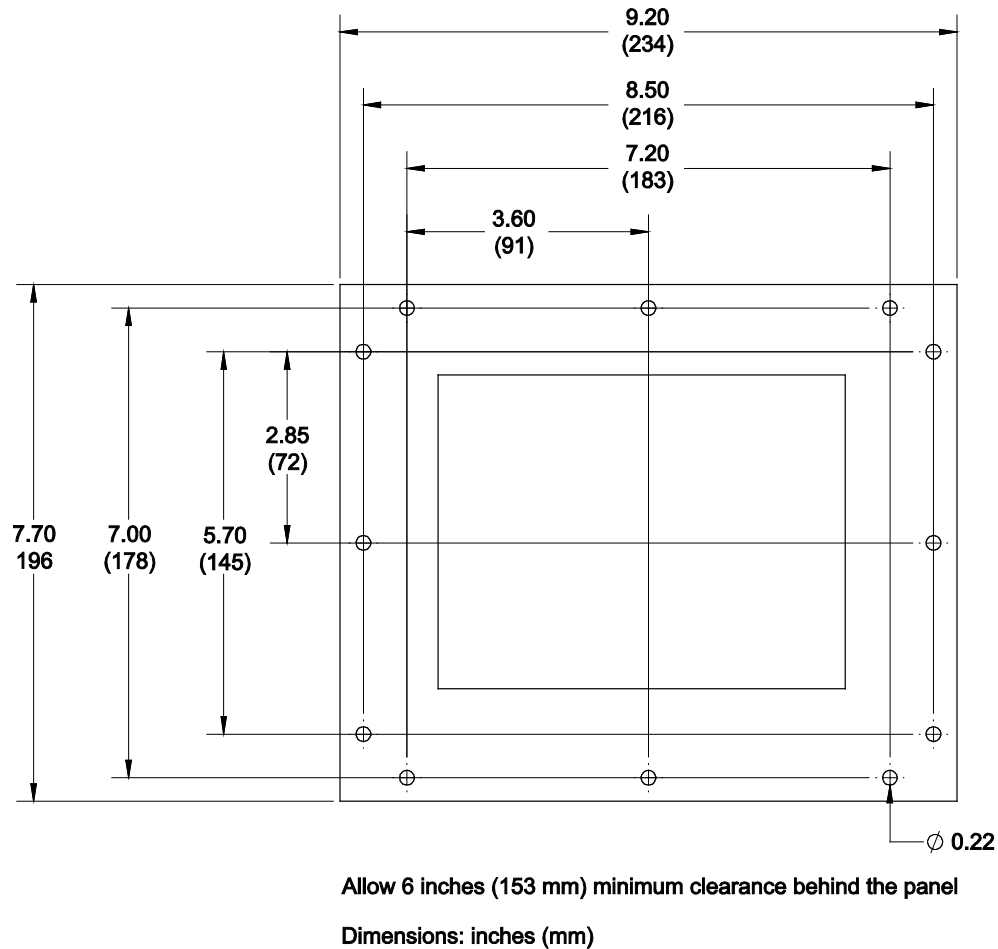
SMI 2 Panel Mount: Mounting Dimensions
